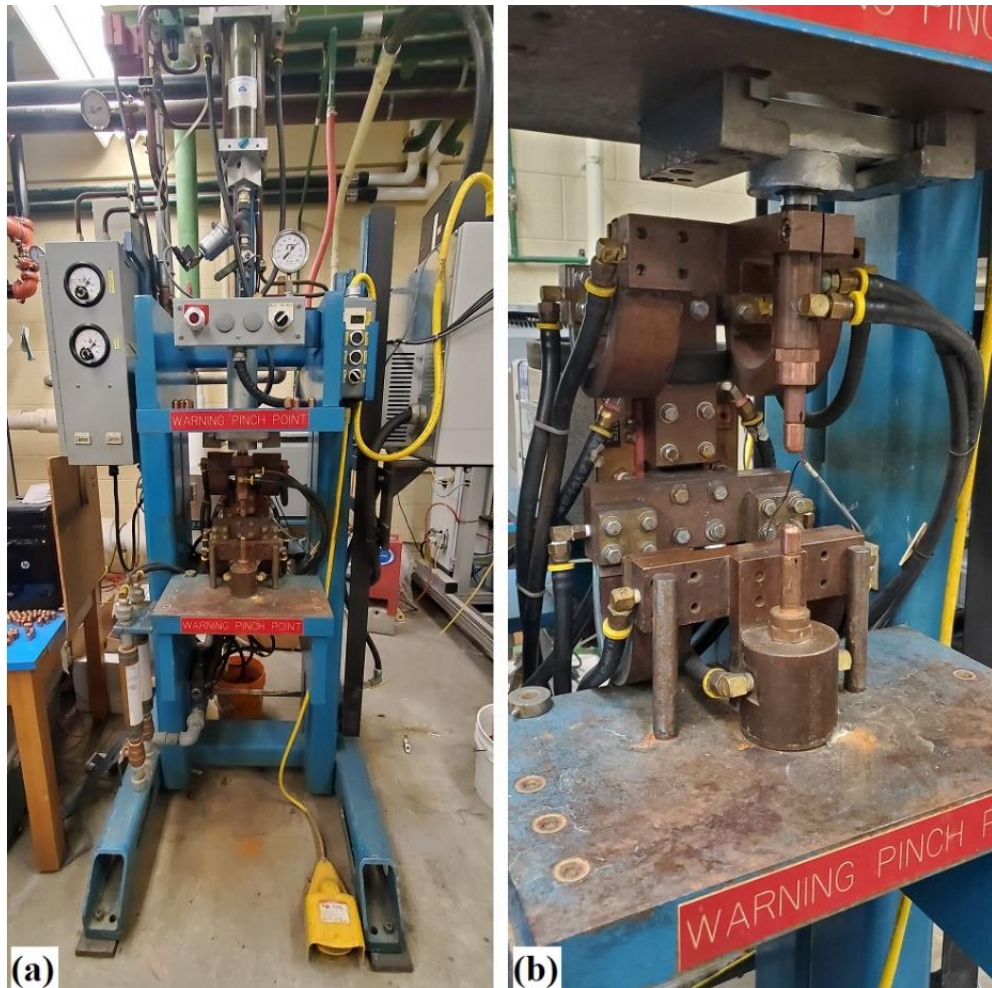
(a) MFDC resistance spot welder and (b) detail showing the welding setup with domed electrodes.
